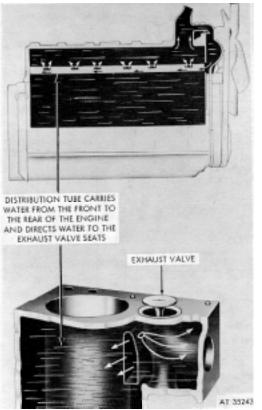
Coolant flow through water distribution tube in engine water jacket. Section III. INTER-RELATION OF COOLING SYSTEM AND OTHER ENGINE SYSTEMS
